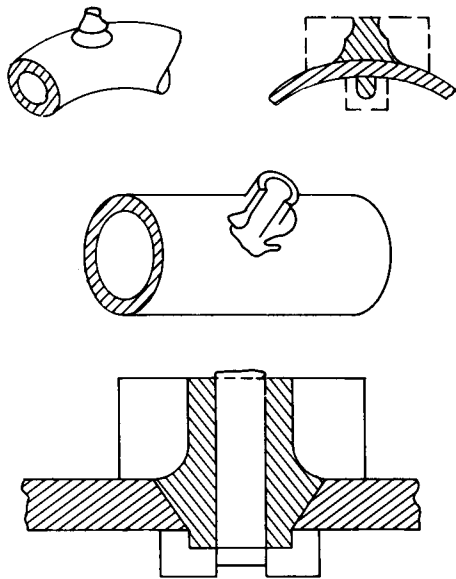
Application of electroslag welding to incorporate penetrating members such as nozzles onto thick-wall pressure vessels. Source: Ref 38
